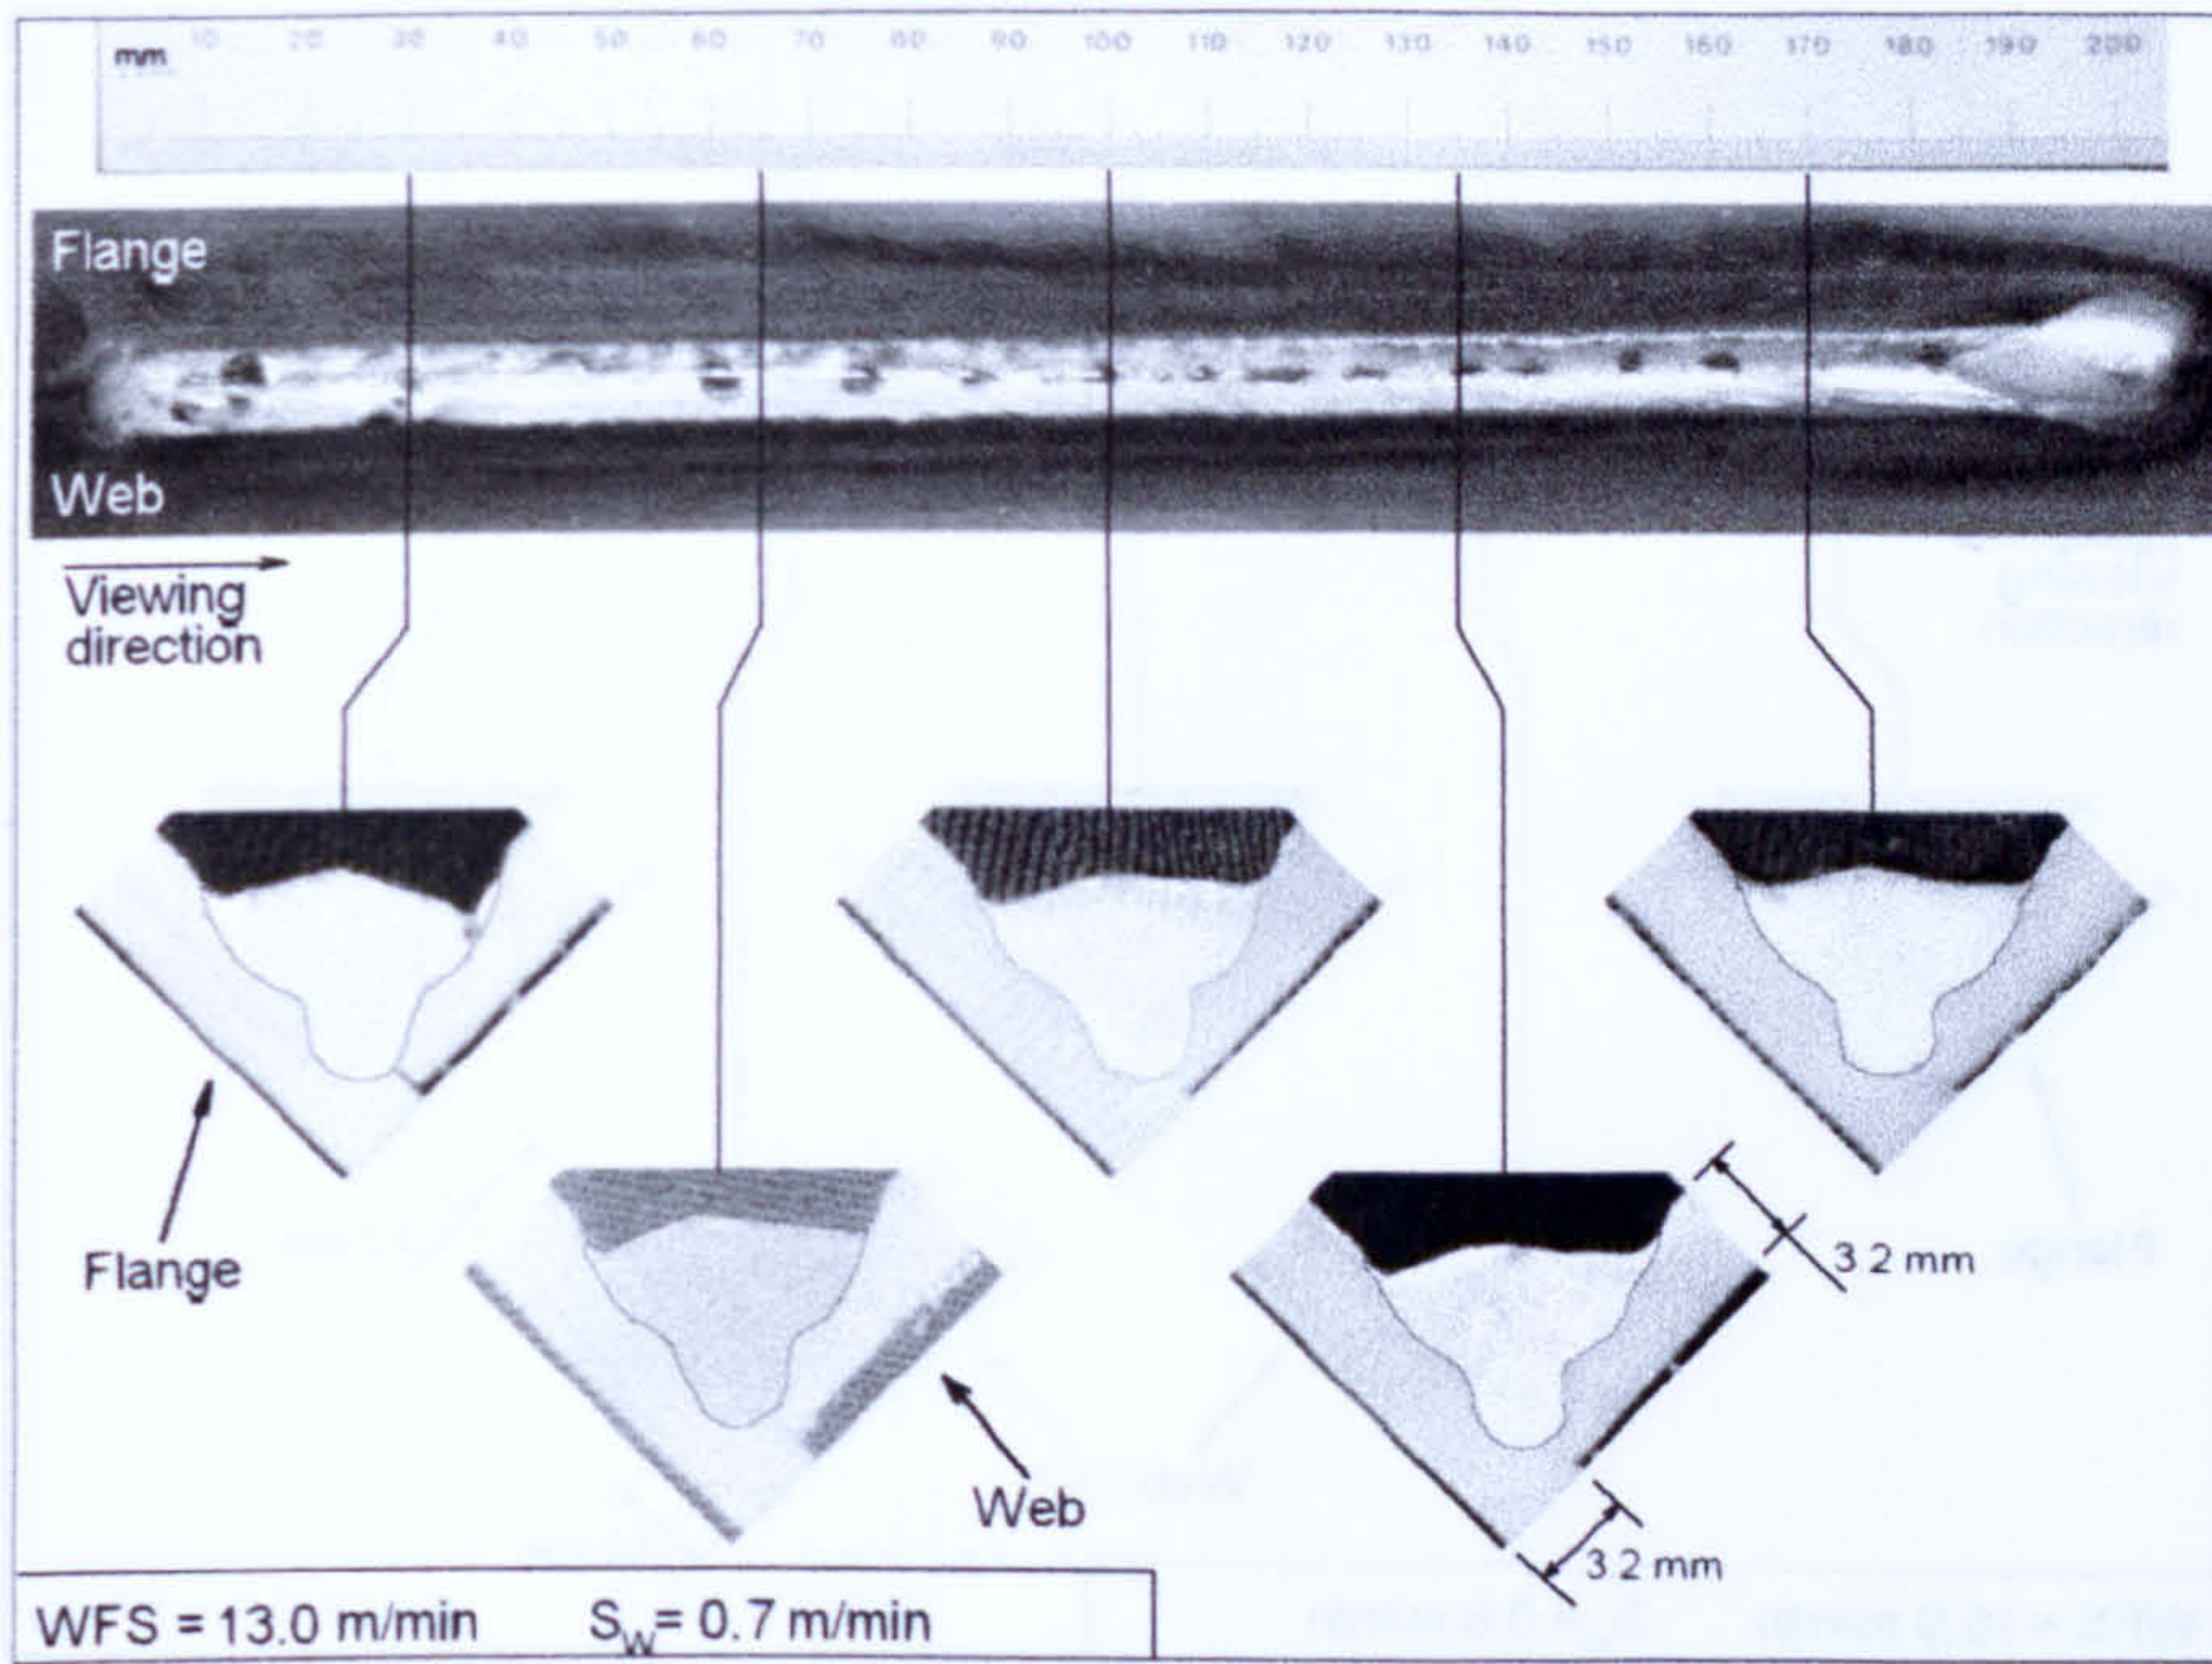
Bead appearance and bead profiles along the weld for the stand-off controlled fillet welding trial "S5".
